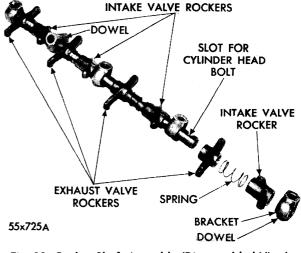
Rocker Shaft Assembly (Disassembled View) (SpitFire)
